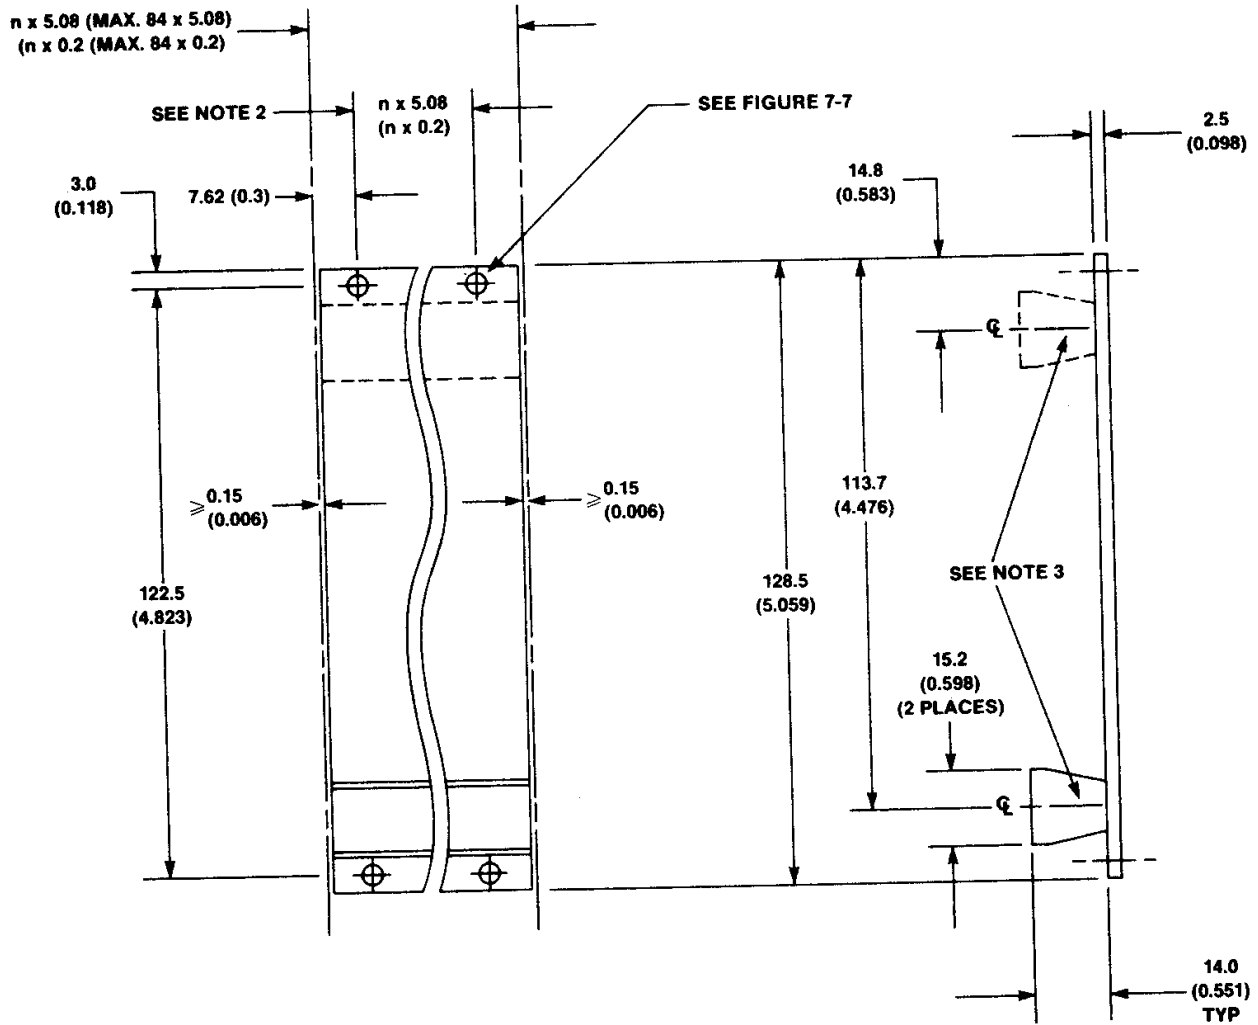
Front Panel Mounting Brackets And Dimension Of Single Height Boards.
